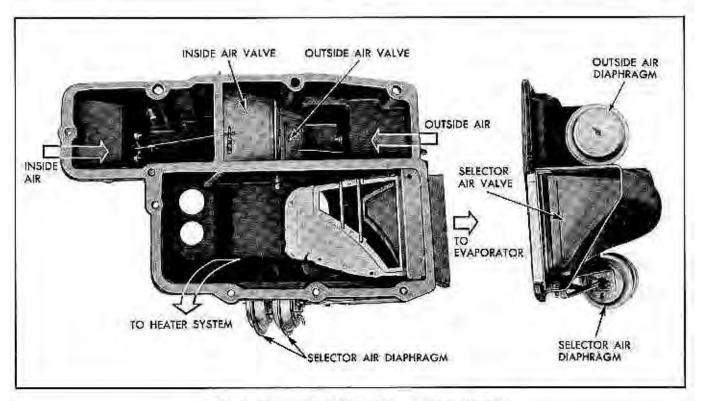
Blower and Air Inlet Duct Assembly-Air Flow
